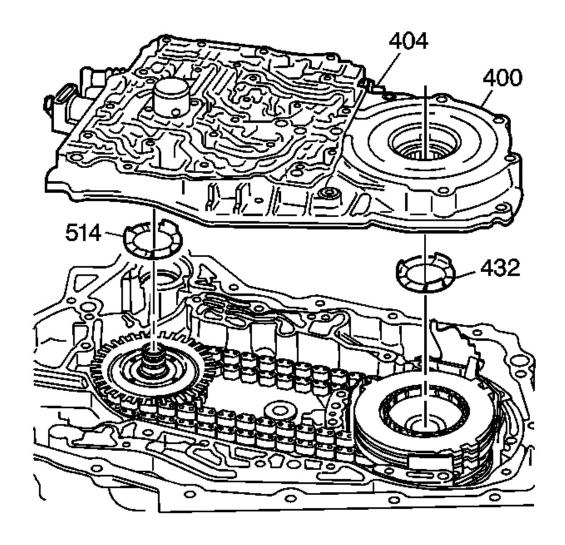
Identifying Fourth Clutch Shaft Thrust Washer & Drive Sprocket/Case
